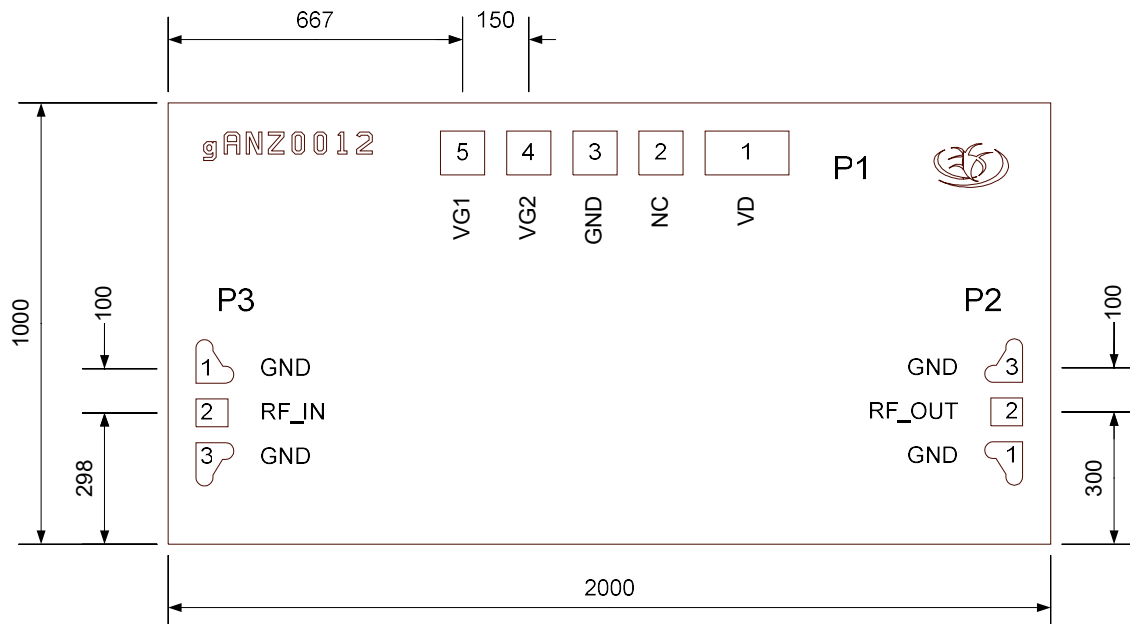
Outline drawing of the MMIC. Dimensions are in µm.
